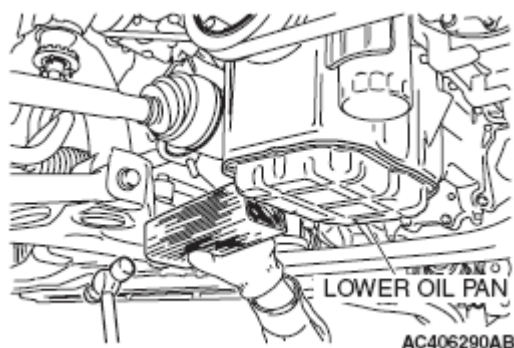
Identifying Engine Oil Pan Removal Groove (Rear)
